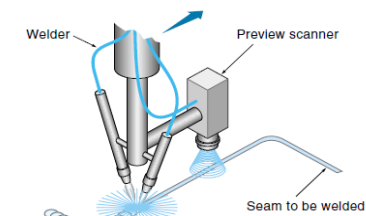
A welder using a preview sensor for PIP control.
